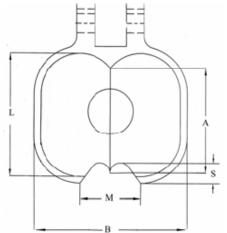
Bucket Dimensions for Pelton Turbine [6]
